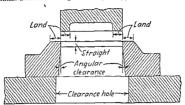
Schematic drawing showing straight, land, and angular clearances.²
